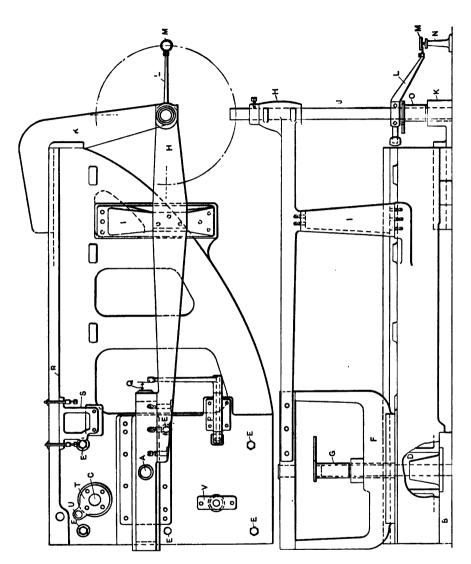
Method of Setting and Laying out Holes for the Driving and Feed Members on the Front Housing
